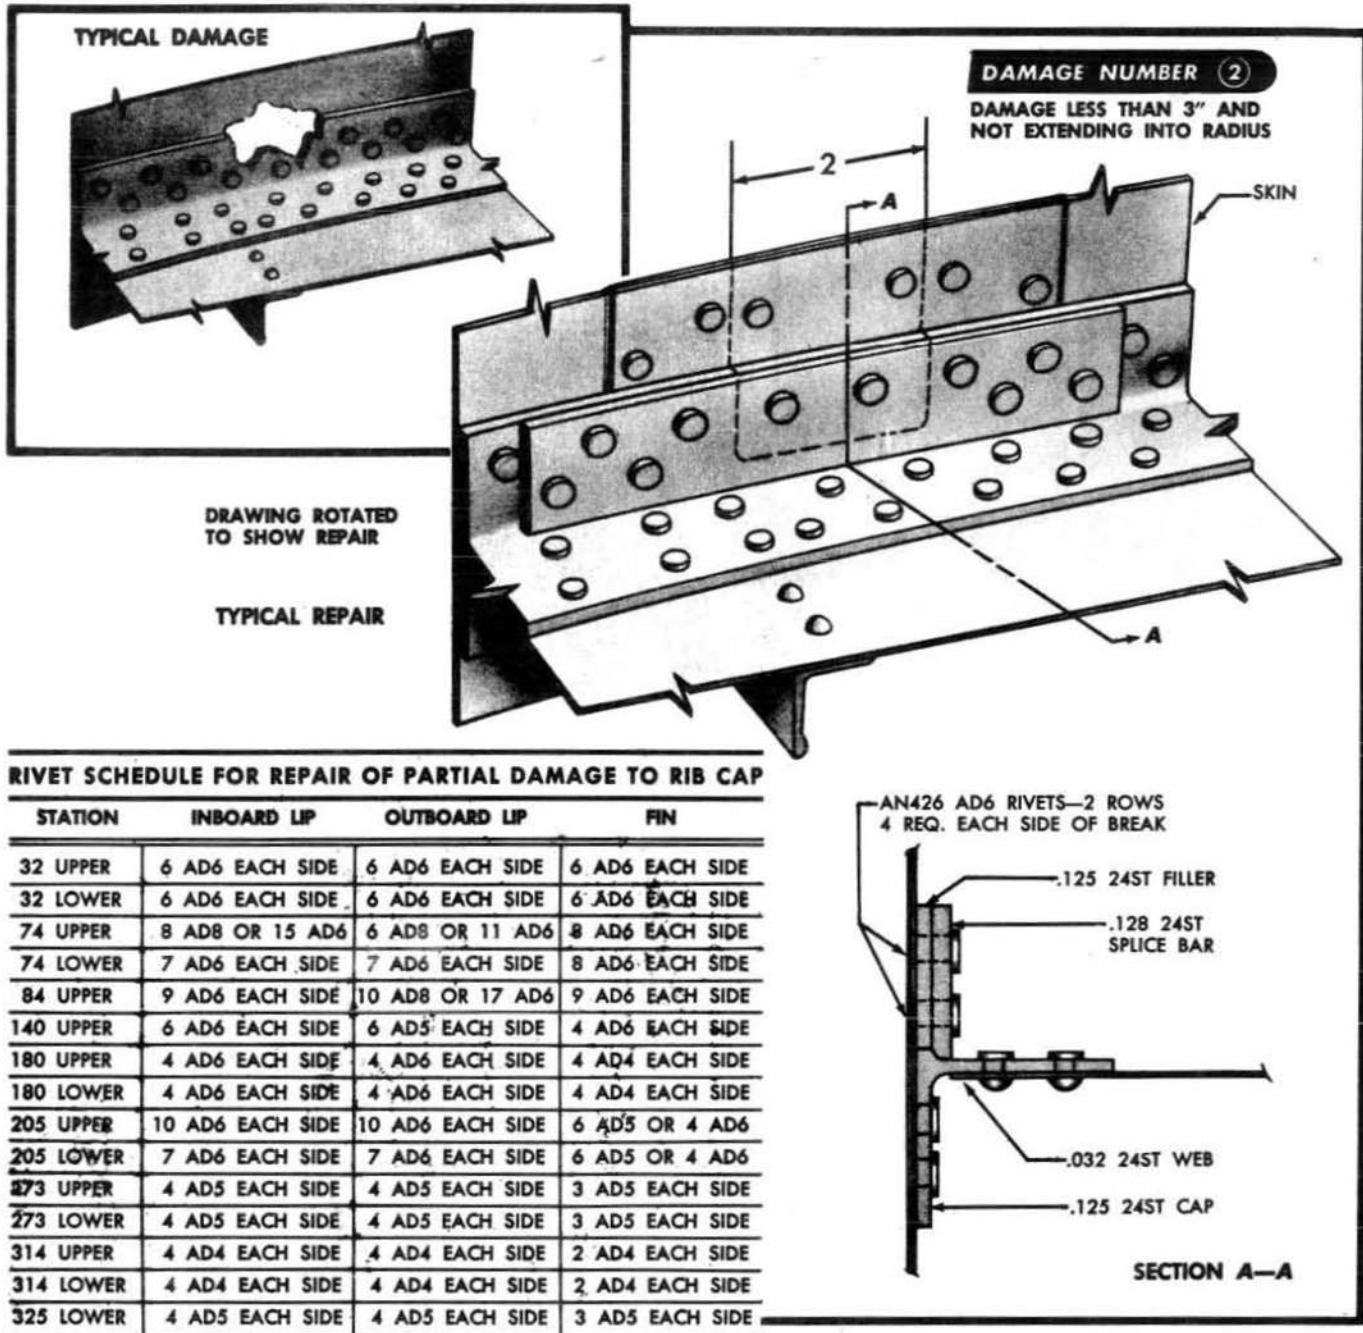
Key Drawing of Typical Damages to Wing Center Section Rib
